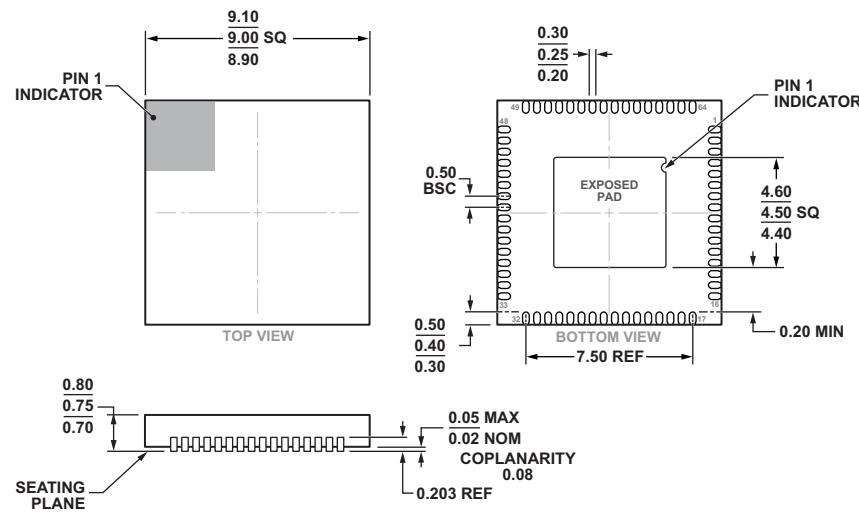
64-Lead Frame Chip Scale Package [LFCSP]
